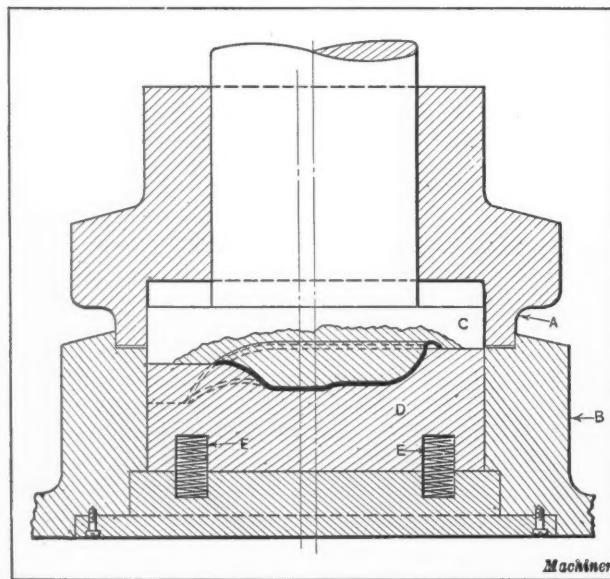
Combination Blanking and Drawing Die employed in producing the Seat illustrated in Fig. 1
